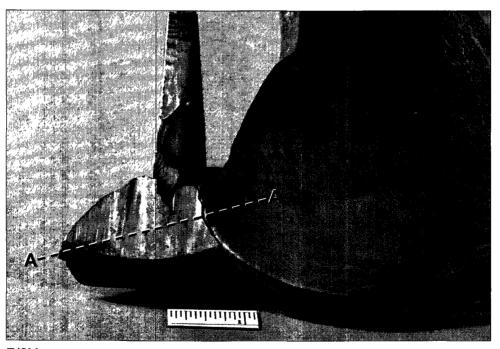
Additional close-up views of inside diameter surfaces of burner tip.
